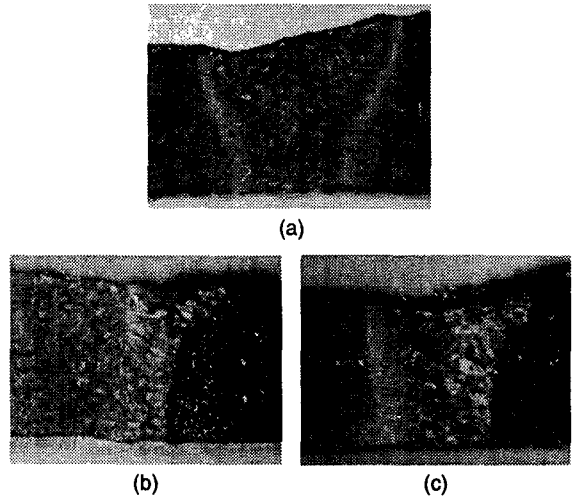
Bead cross sections under welding speed 3m/min and laser power of 3.5kW with various combination.
